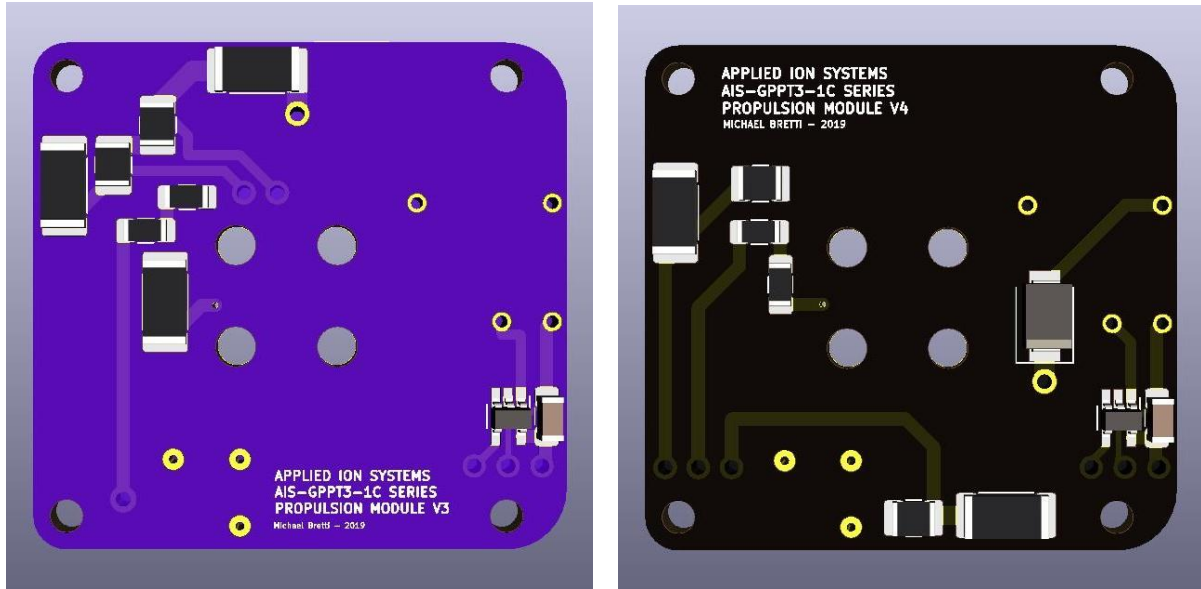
AIS-gPPT3-1C Thruster Module PCB Back – V3 (left), V4 (right)
